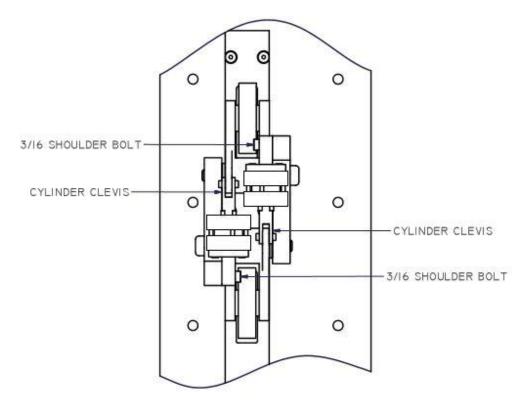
Pivot Roller Cylinder Assembly Diagram
